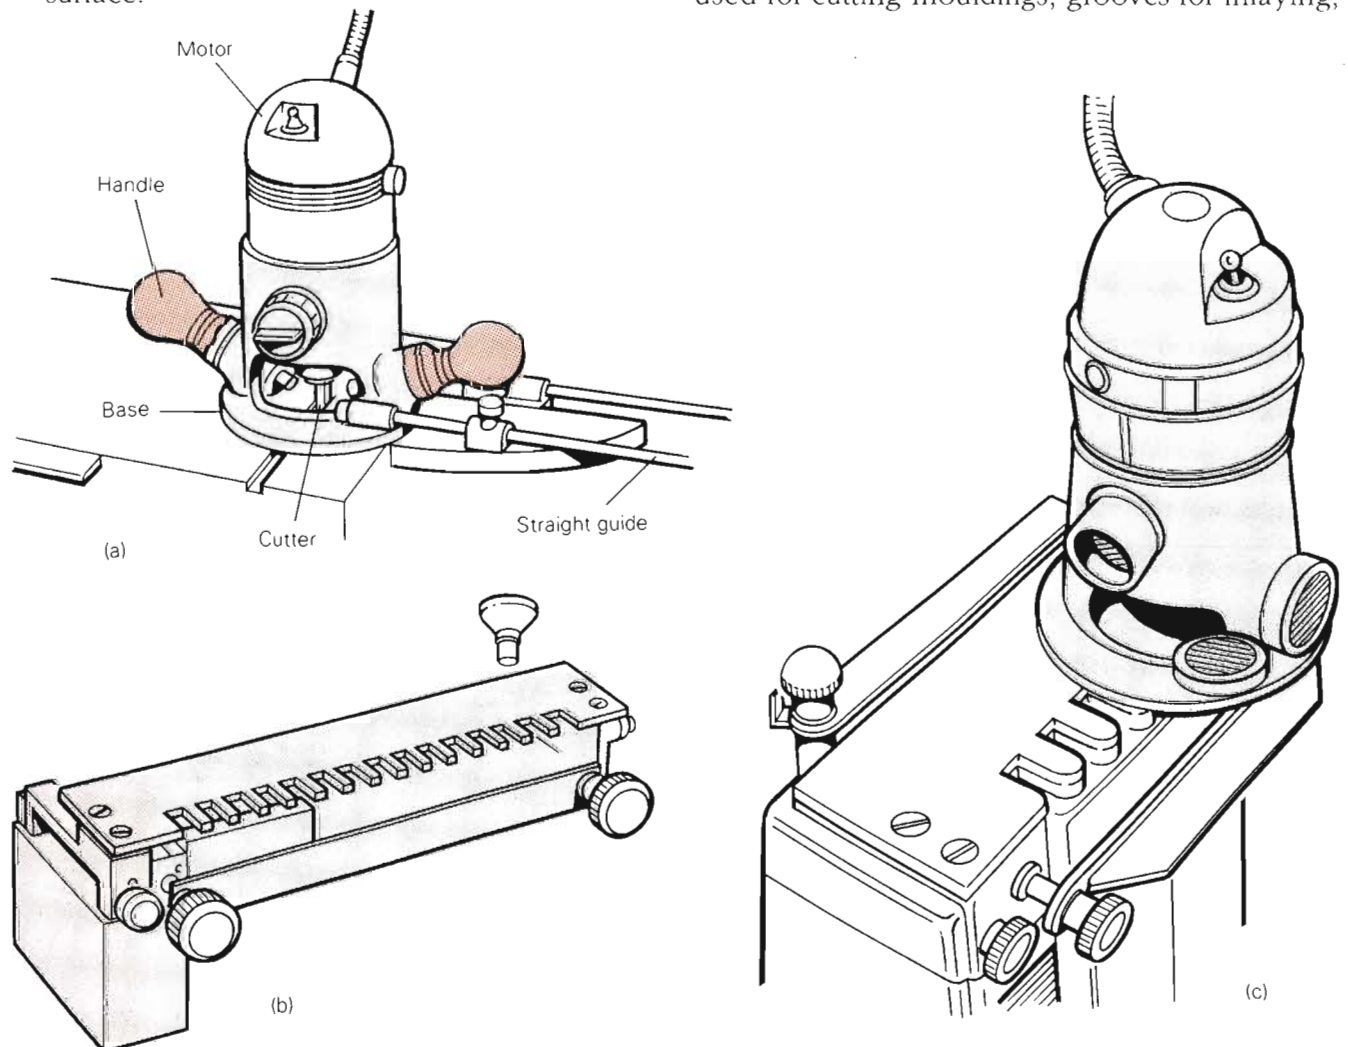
Portable hand router: (a) the router, (b) dovetail template, (c) cutting the dovetail.
